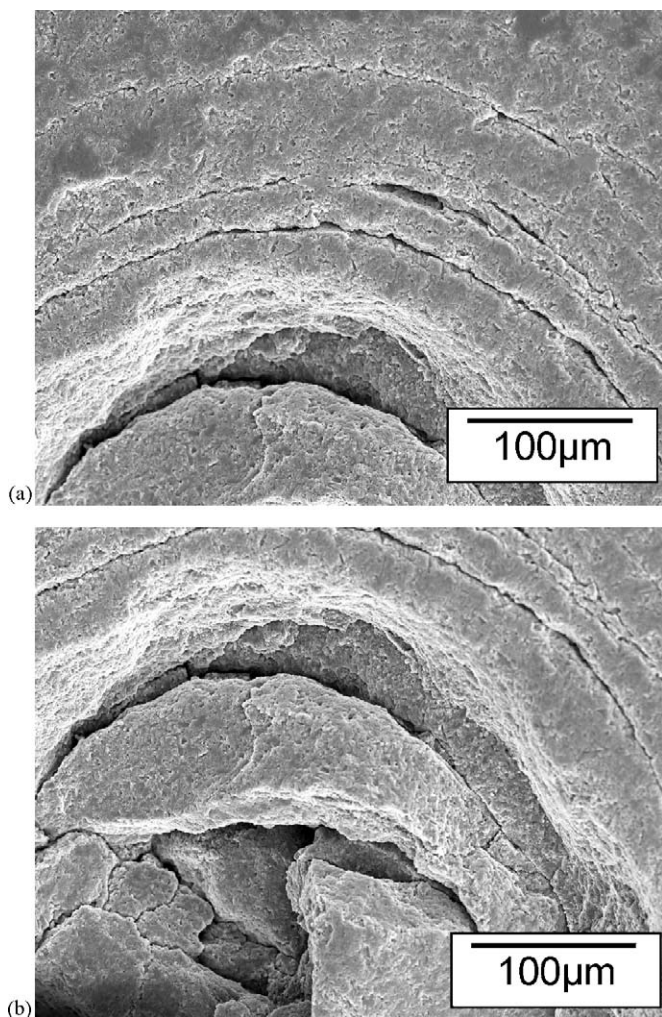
Secondary cracks created on the surface of Fine-02 specimen.
